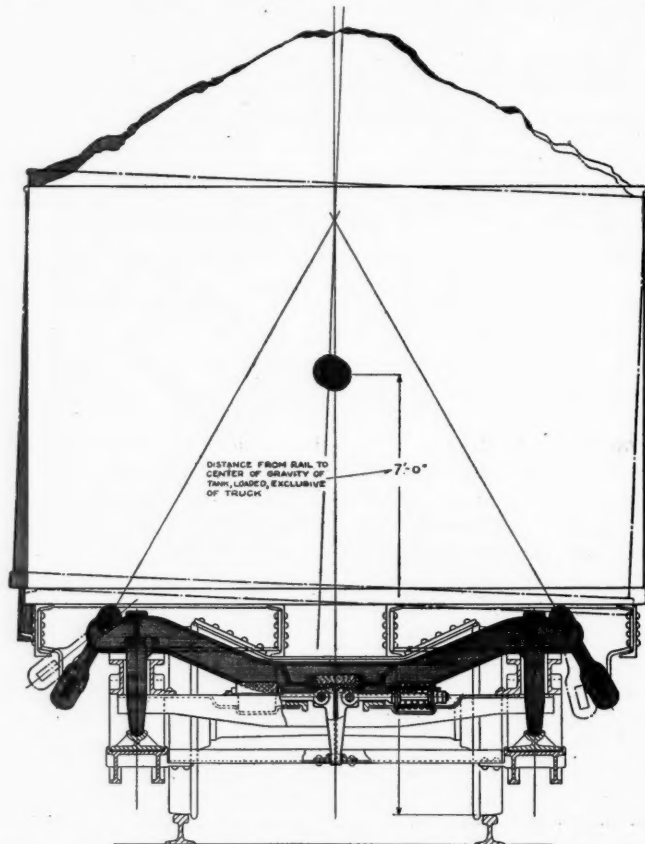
Cross Section Through Tender With Balanced Side Bearing Truck.
